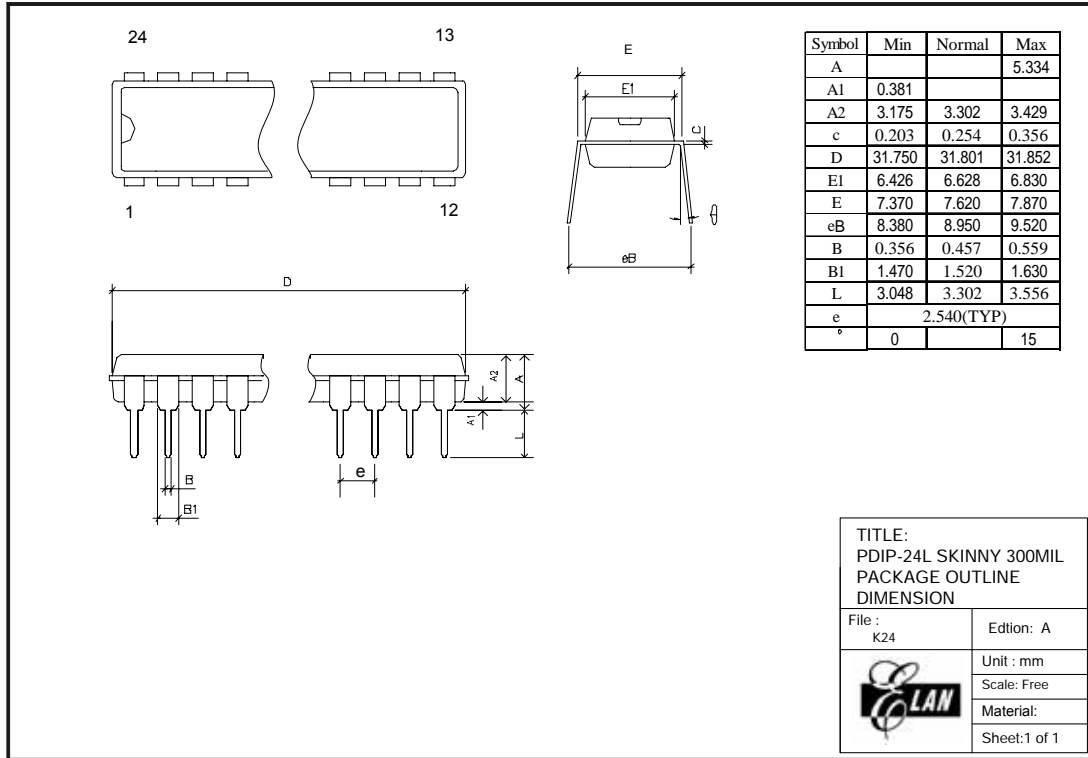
EM78P346N 24-pin Skinny DIP Package Type
